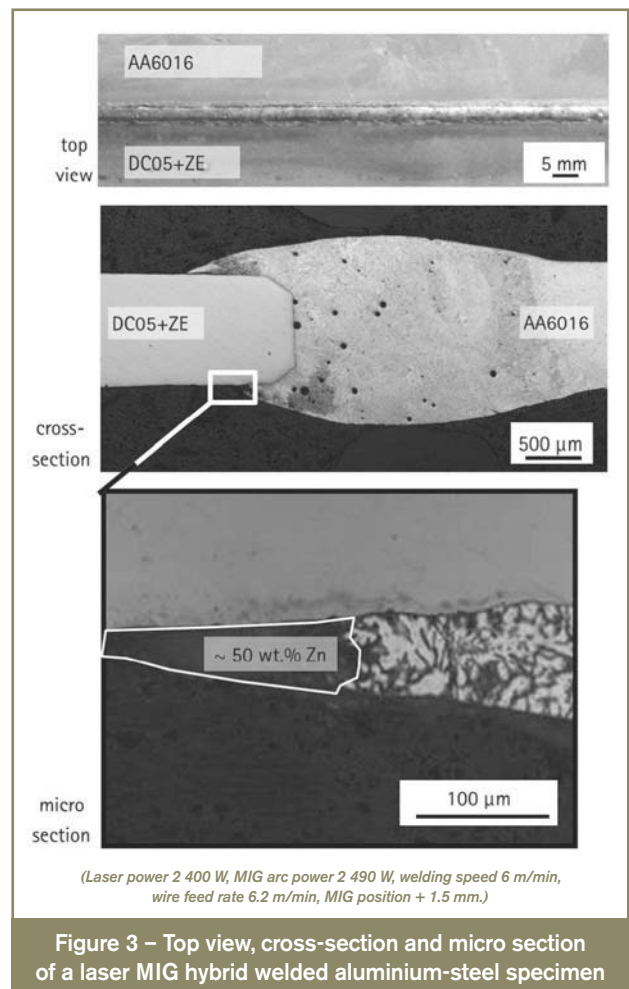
Top view, cross-section and micro section of a laser MIG hybrid welded aluminium-steel specimen
